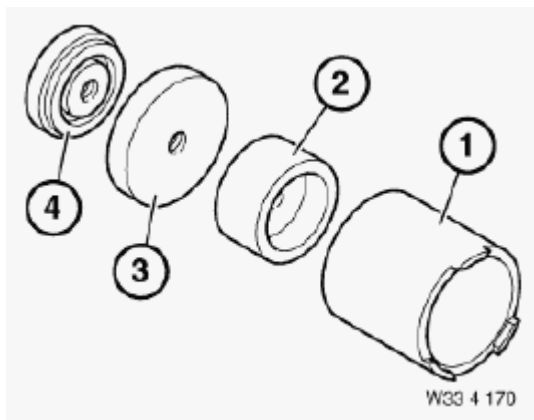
Removal/Installation Thrust Pieces (33 4 170)
